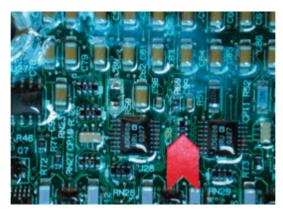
Populated PCB showing extensive flux residue corrosion.
